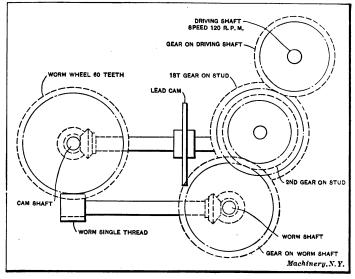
Diagram of Gearing on the No. 2 Brown & Sharpe Automatic Screw Machine
